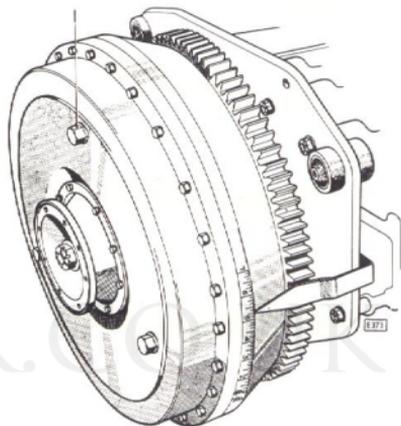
Position of engine flywheel for fuel-injection pump spill cut-off point and (1) for filling or topping-up.
